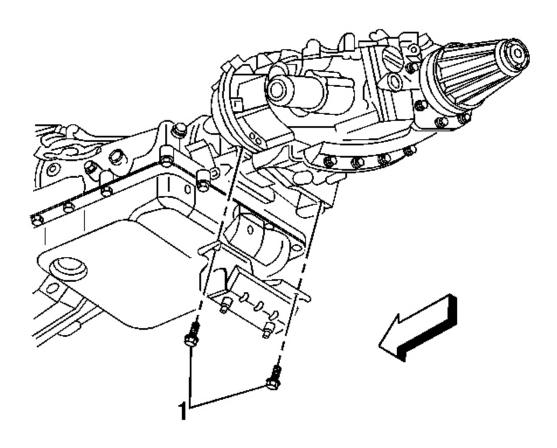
View Of Transmission Mount & Bolts (LM4) Courtesy of GENERAL MOTORS CORP.
